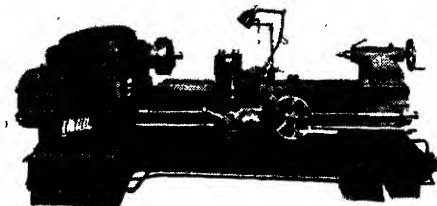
An All-Geared Centre Lathe, 8½-in. Centre.
